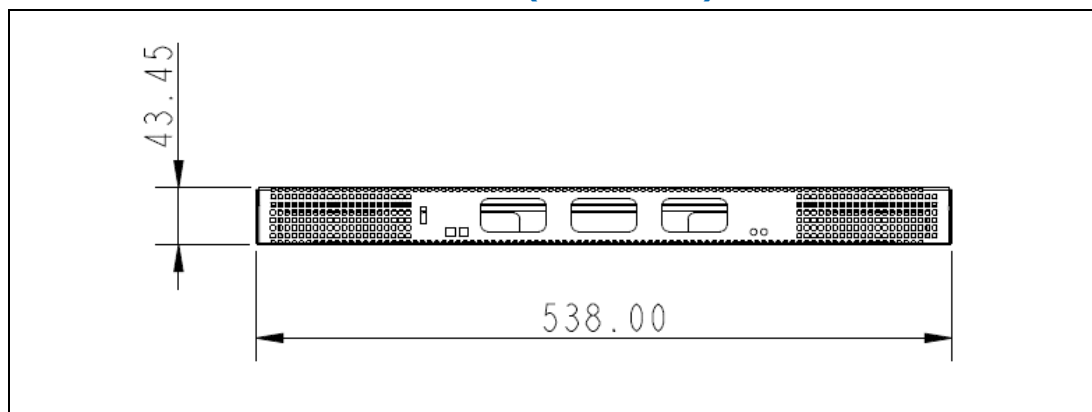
1U Server Chassis Dimensions (Front View)
